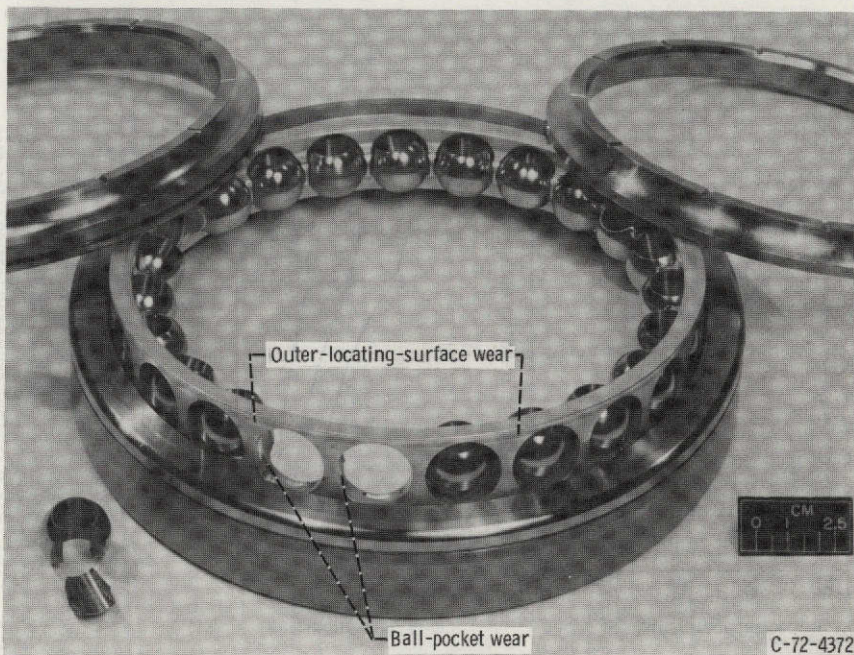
Drilled ball bearing 377A after 17 800-newton (4000-lbf) thrust load run at speeds from 6670 to 13 000 rpm (1 million to 2 million DN), showing ball-pocket and outer-locating-surface cage wear. (Ball fractured at 13 000 rpm.)
